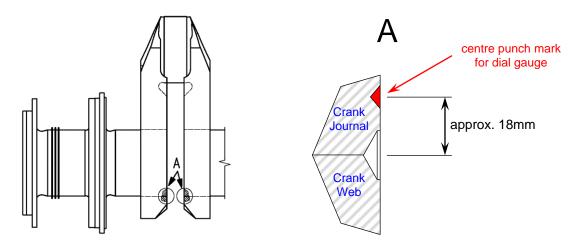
positions of round centre punch mark dedicated for inserting the crankweb deflection measurement gauge
